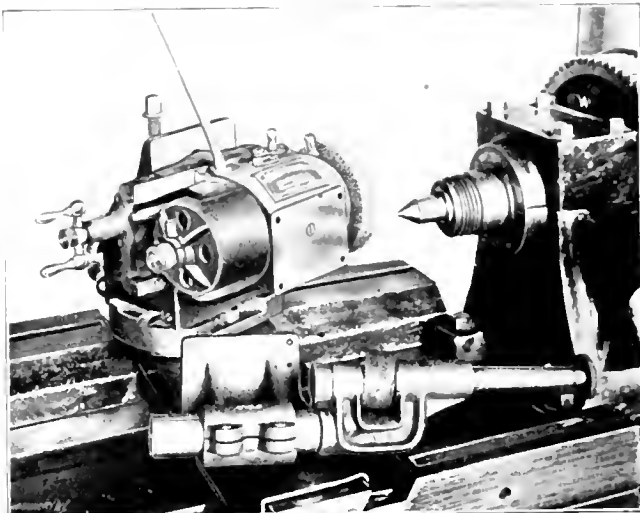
Electric Grinding Attachment Mounted on Compound Rest Swivel of Lathe
